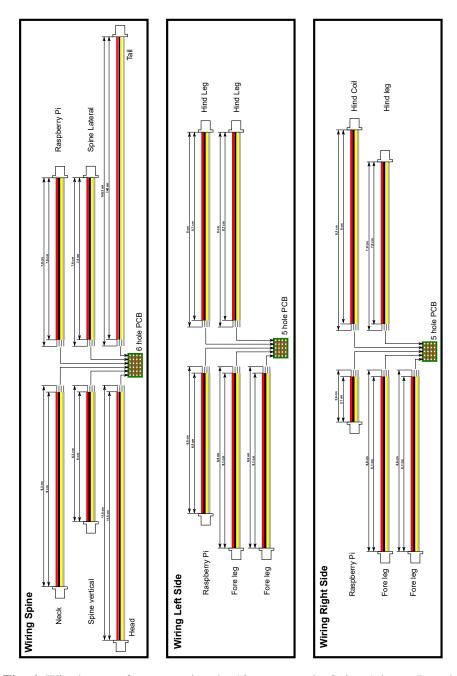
Wire harness for connecting the 13 servos to the Spine Adapter Board.
